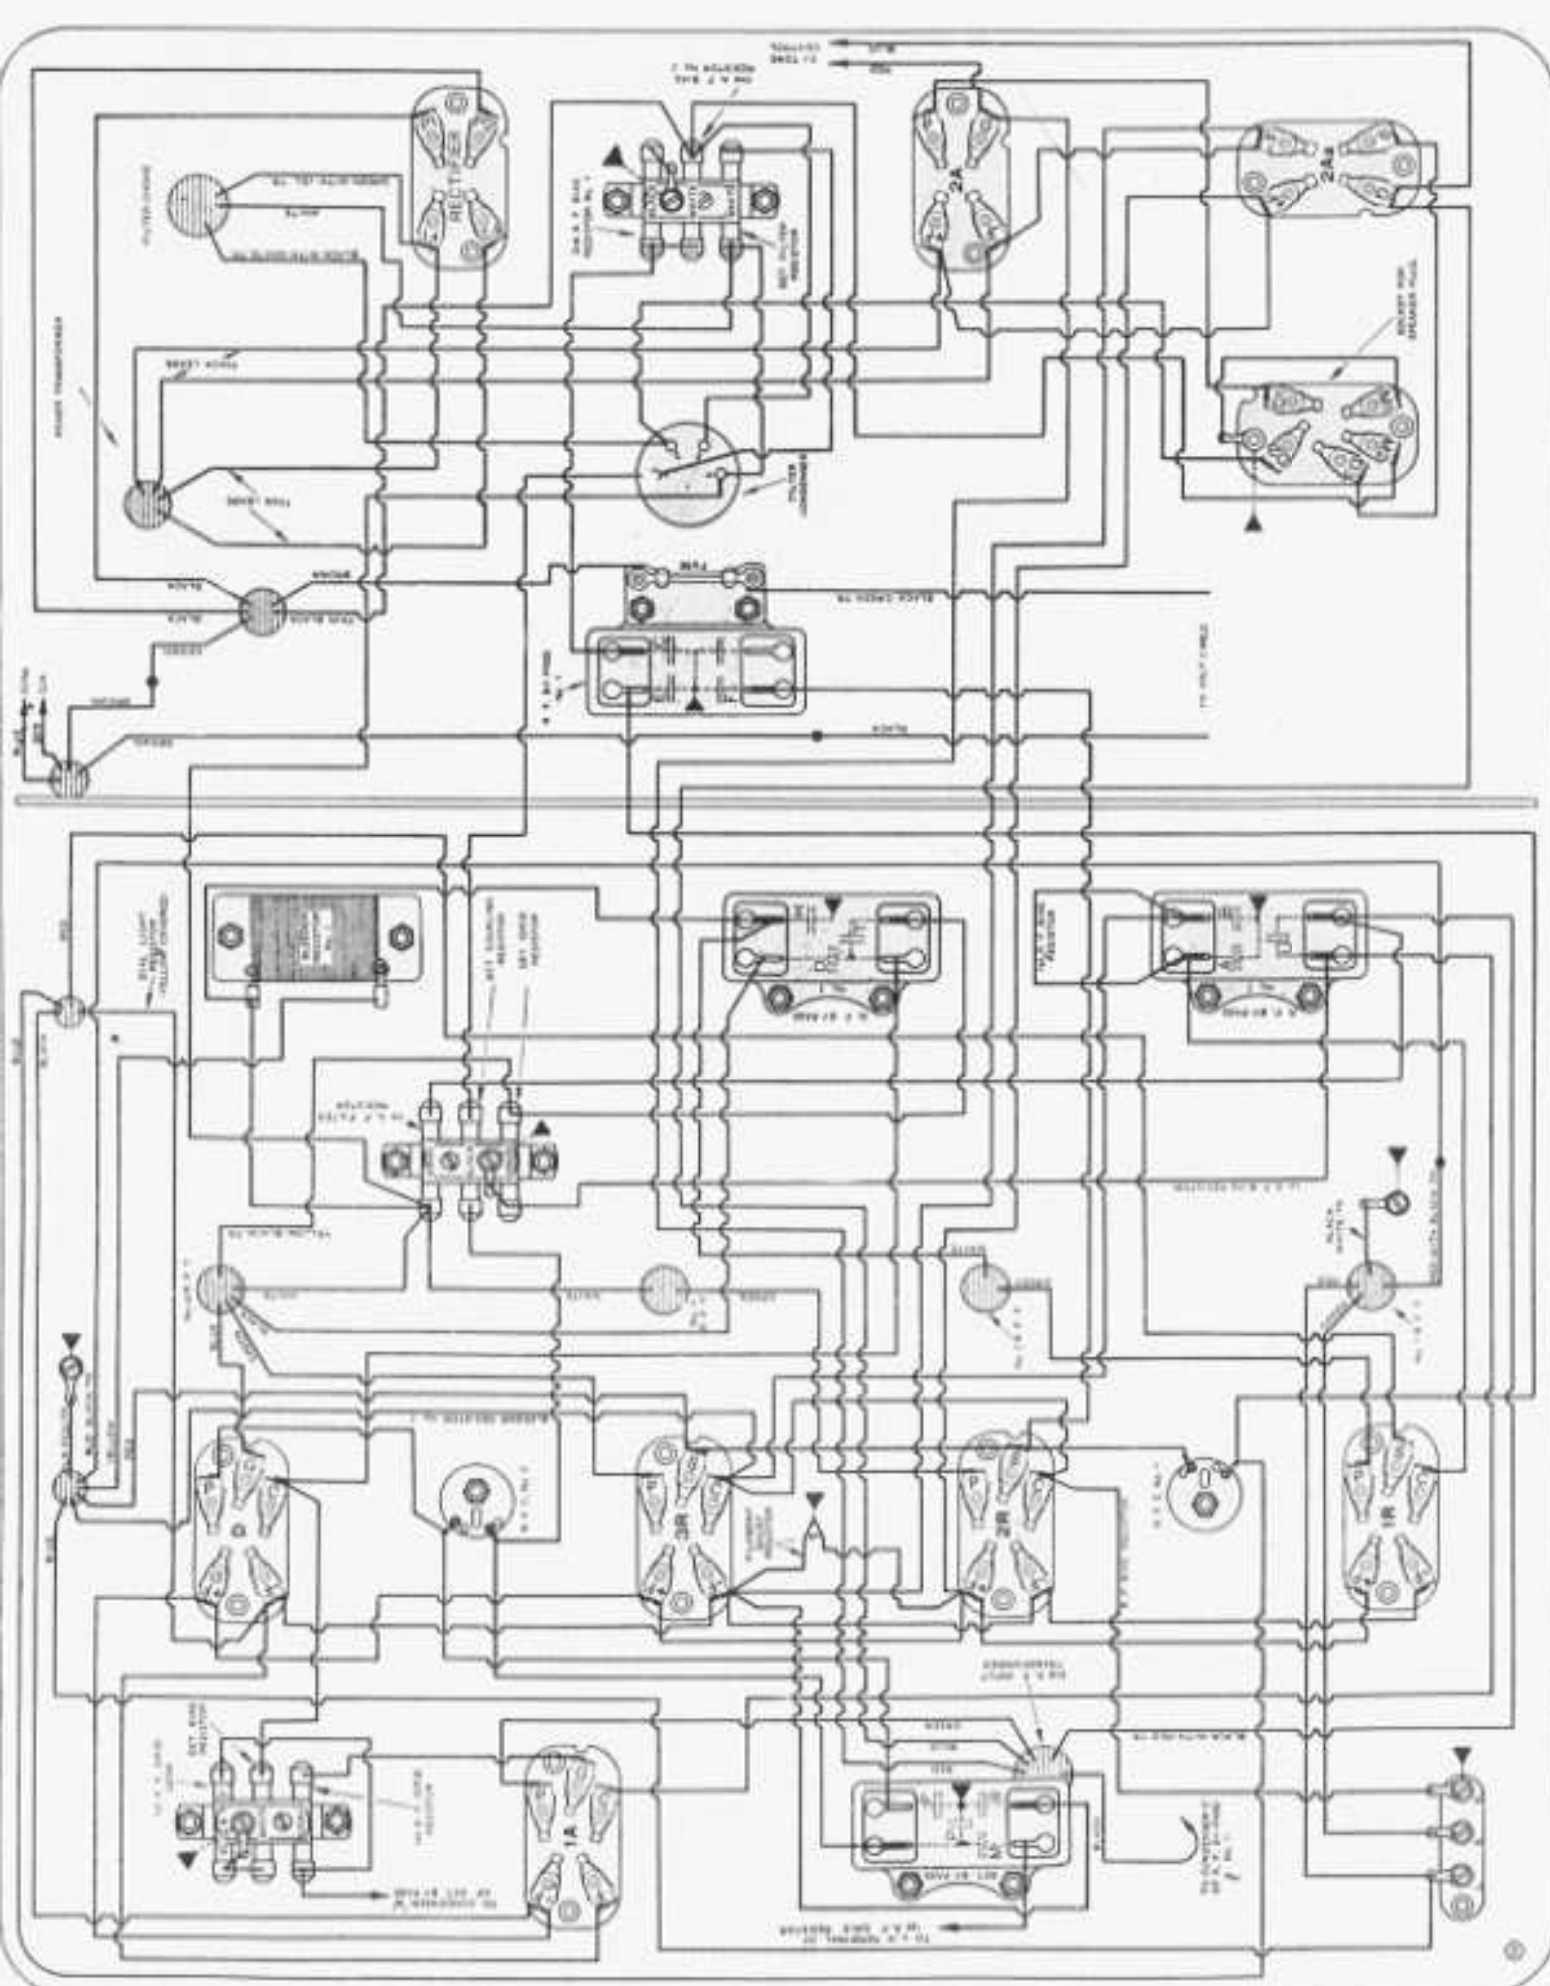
BOTTOM WIRING OF TYPE F CHASSIS RECEIVER
